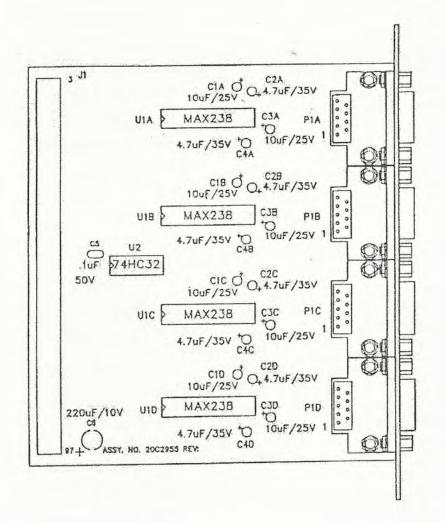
Quad RS-232 Interface Assembly 20C2955 Rev A
